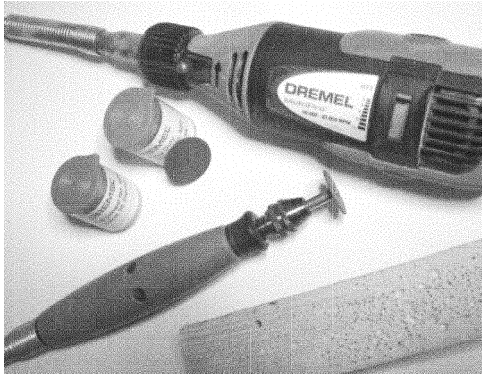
More cutting tools: a Dremel rotary tool with flexible axis and a cut-off disc, a set each of regular and “heavy duty” cut-off discs, and a piece of wood to be used as support.
